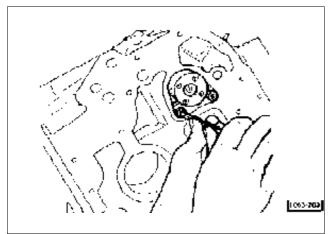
Install the camshaft in crankcase. Mount the forked flange permitting the camshaft to be positioned. Make sure the camshaft is free to rotate with a slight amount of end float. Warning - If the timing gear has been removed or replaced a new valve timing should be performed;
